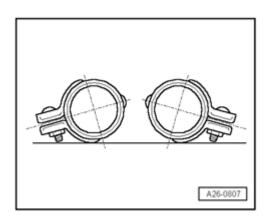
Installing Double Clamps So That Bolt Ends Do Not Project Over Lower Edge Of Double Clamp
